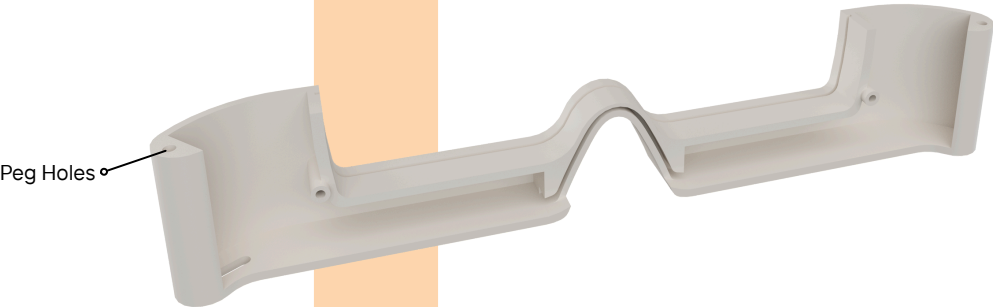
Goggles Bottom Half (Rear View) featuring peg holes
